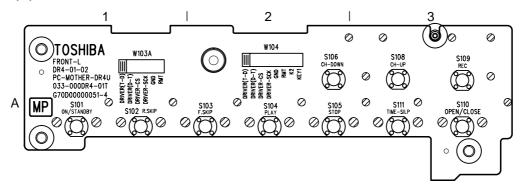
EU03B Front (L) PC Broad (Top side)
